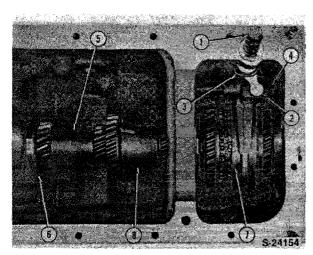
Main Countershaft and Shuttle Shift Shaft and Arm Removal
